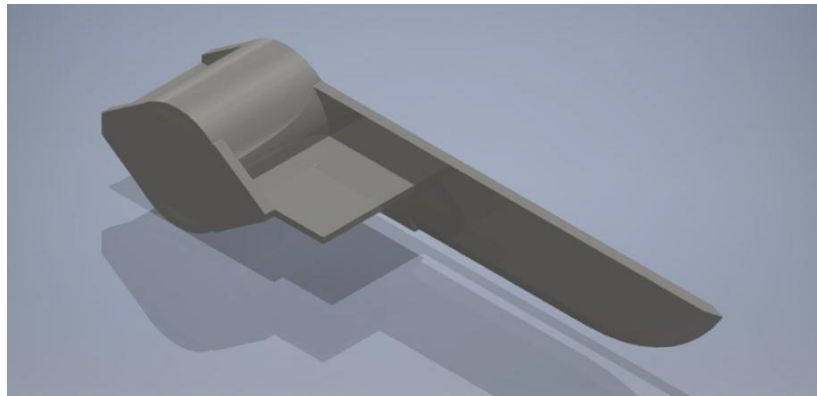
Render of a cutter tool using the ACT specification on it's handle. This knife is used to cut cables that secure objects within the garage during launch and landing.
